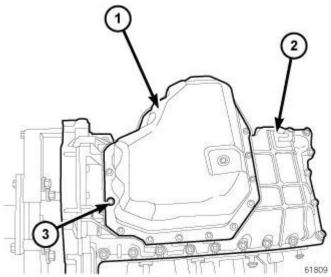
LOWER OIL PAN Courtesy of CHRYSLER LLC
